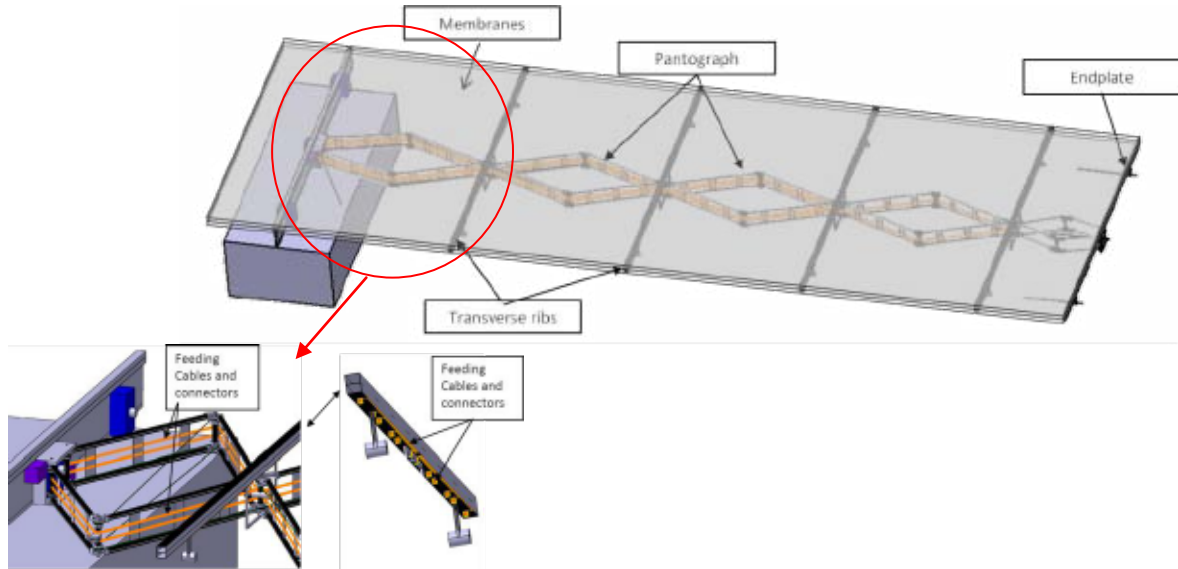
Mechanical design of the DRA antenna; deployed view (one wing shown)
